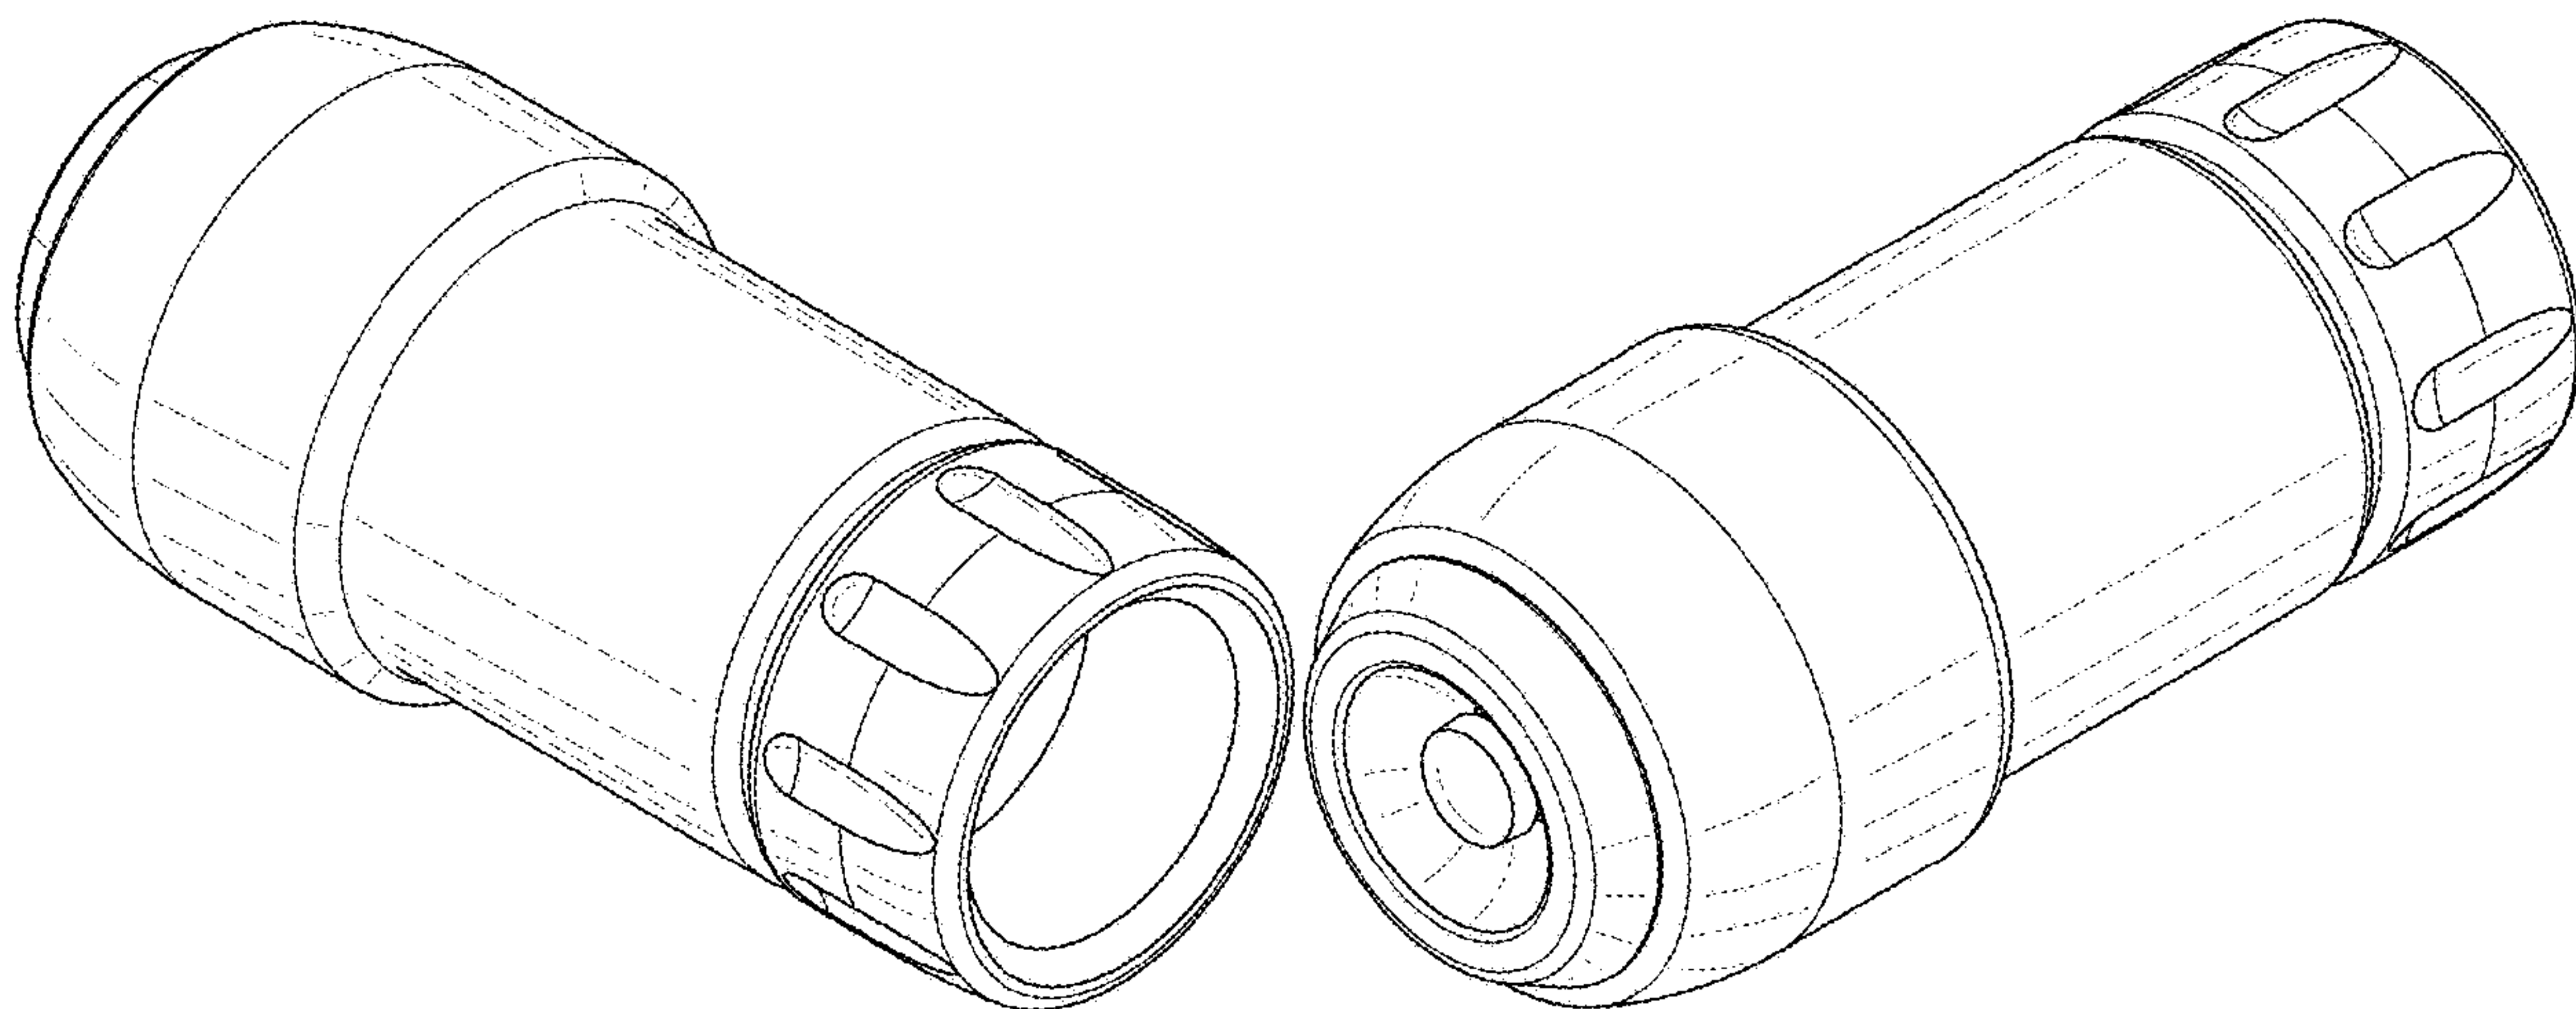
is an isometric view of the front, top and left side of the alternative embodiment with knurling;
